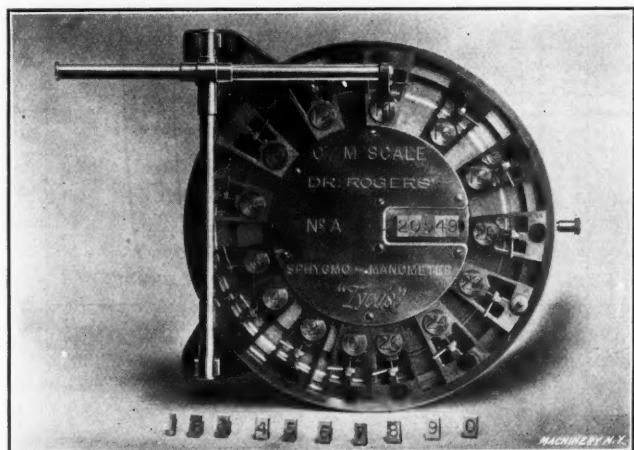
Jig Copyholder for Adjusting and Holding Copy to suit each Disk
